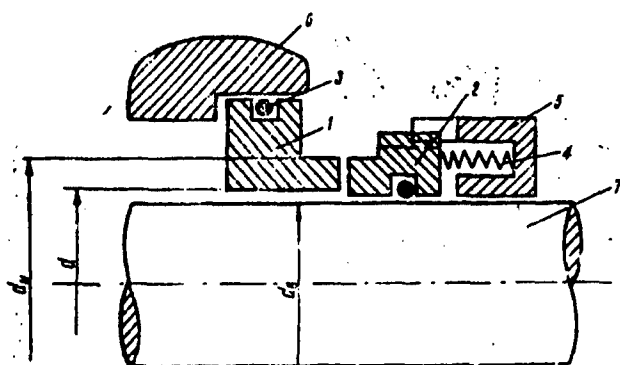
Diagram of face packing for an electric drill. 1 - fixed ring; 2 - steel ring; 3 - rubber packers; 4 - spring; 5 - bushing; 6 - housing; 7 - shaft.
